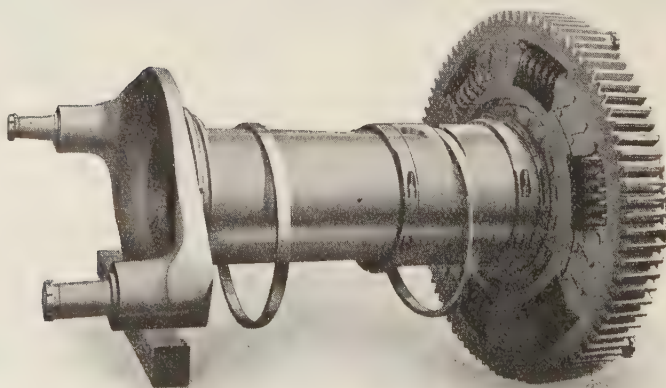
Hollow shaft with sprung gear wheel (part of assembly shewn in fig. 25).
